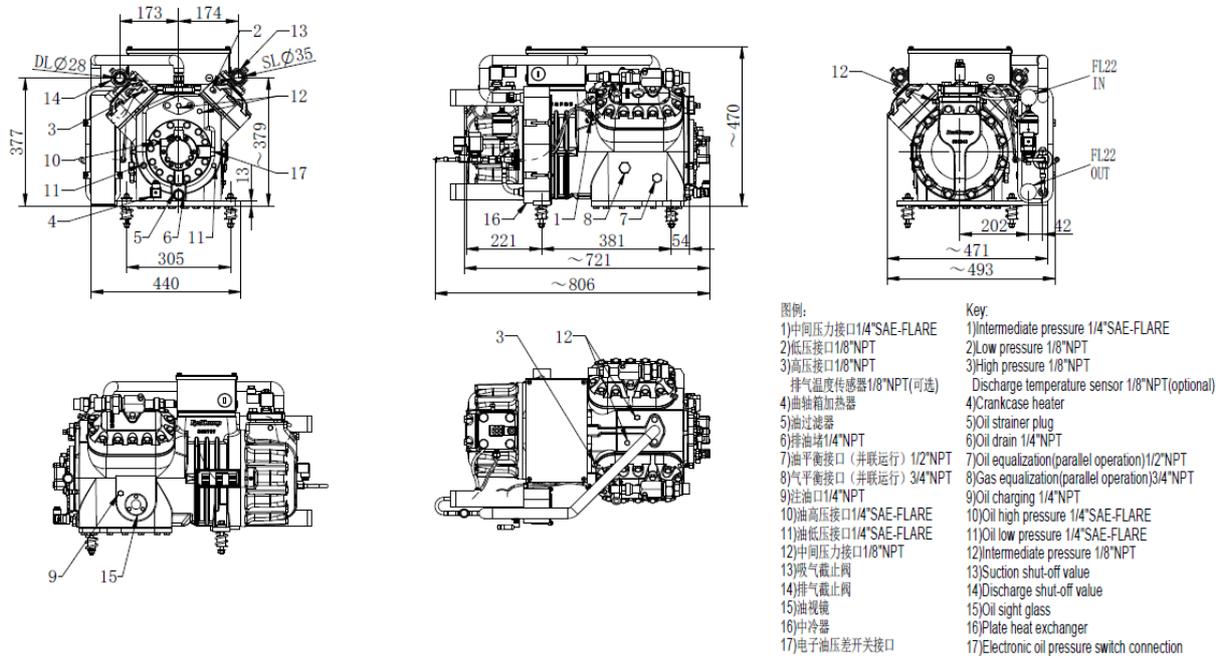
Overall dimensions of model SB4C-1200/1400
